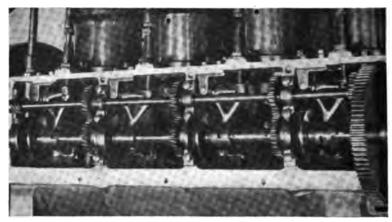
Harrison Car, Menges' gas engine reversing action, side of crank box removed. The exhaust valves alone are mechanically operated, intake valves automatic. The cam shaft has fixed to it four disks, formed with integral side cams, and has revolubly mounted on it four disks formed with coacting face cams; the hubs of these looses side cam tasks are splined to slide on and turn with the hubs of four gears, engaging four gears fixed to a hand rotated reversing shaft journaled above the crank snaft. The time of the first four side cams is fixed, but the coacting revolvable cams can be rotated to any time of lengthwise movement on the cam shaft. Four broaze bell crank lifters have their lower downlanging ends in contact with the hand-adjusted cam-lisks and lift the exhaust valves in times varied by the positions of the revolvable cam disks. The hand-turned shaft is rotated from the driver's seat by a pair of 45 deg, angle spiral gears and the vertical shaft. Revolving the hand shaft one way reverses the motor: the other way cause the cylinders to fire in pairs, which is said by Menges to give much greater hill-climbing power than when the cylinders for fer each 10 deg. of crank shaft rotation. Incseviale cams are said to work extremely well, and as the cam shift is all by gearing, with notched quadrant retention, no springs, the timing is infallibly accurate.
